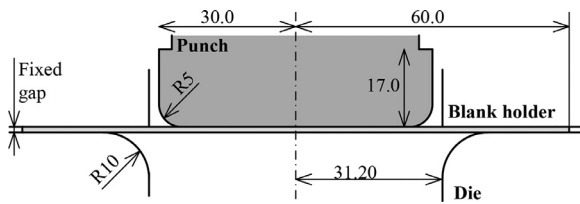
Schematic representation of the forming tools used in the cup drawing simulations (dimensions in mm).
